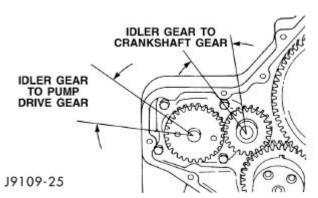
Idler Gear To Pump Drive Gear & Crankshaft Gear Backlash Courtesy of CHRYSLER GROUP, LLC
